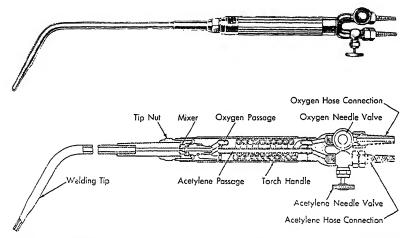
Typical balanced pressure welding torch (Purox) and schematic cross-section.
